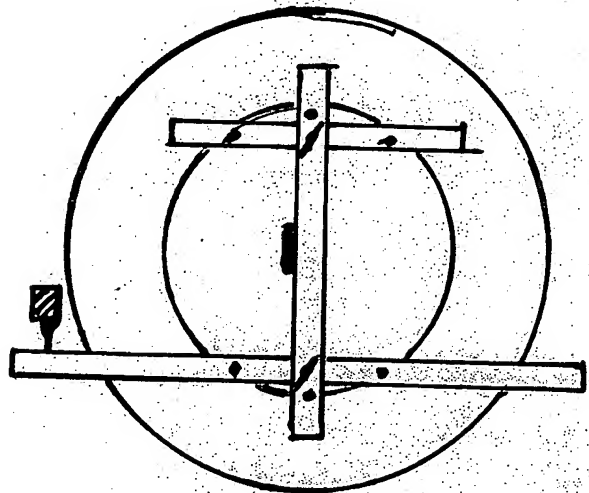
STEERING AXLE ON ROLLER PLATES WITH ALIGNMENT UNIT
